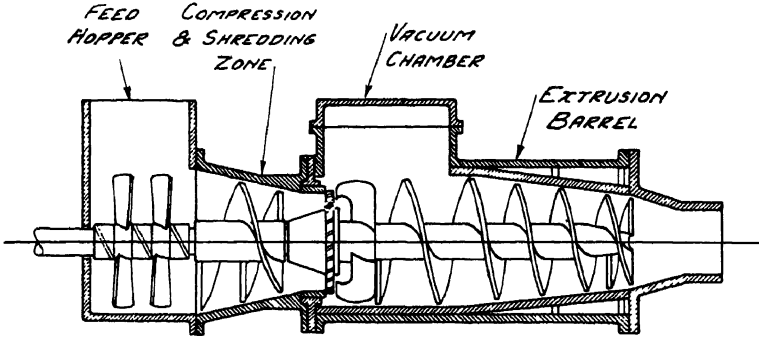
VACUUM-EXTRUSION MACHINE FOR DEAERATING CLAY.
